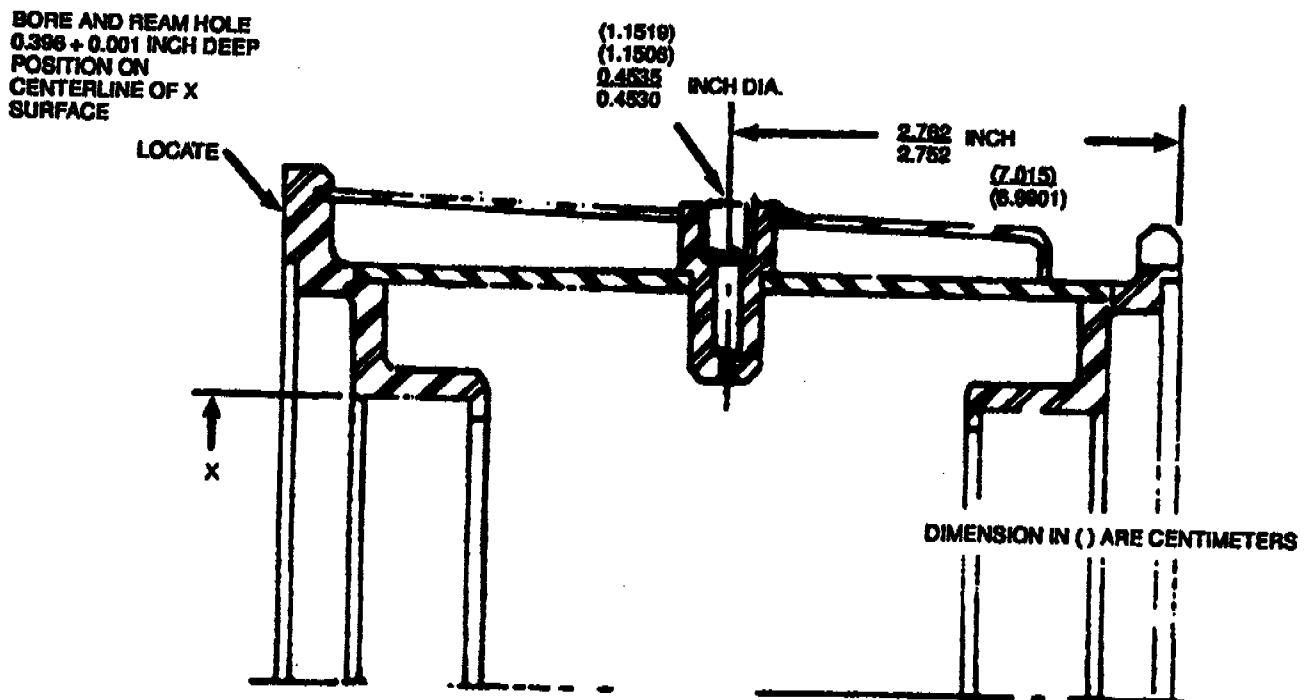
Machining of Oil Line Connector In Preparation for Electron-Beam Weld-Repair of Stripped Threads.
